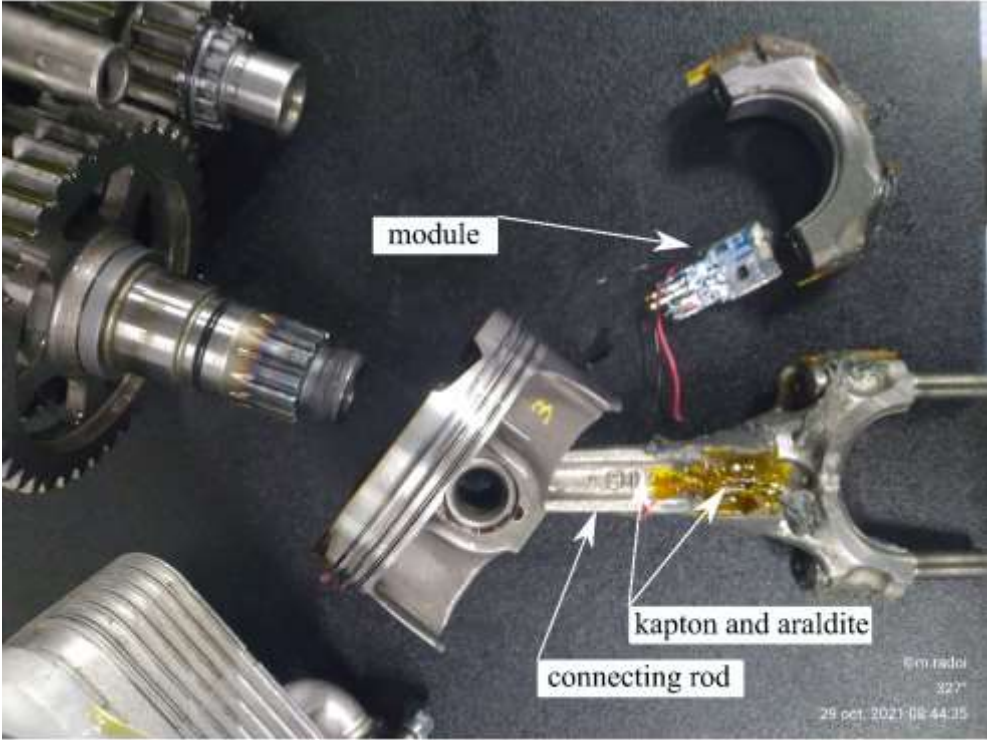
PCB attachment failure due to Kapton-Araldite® 2014-2bond filature
